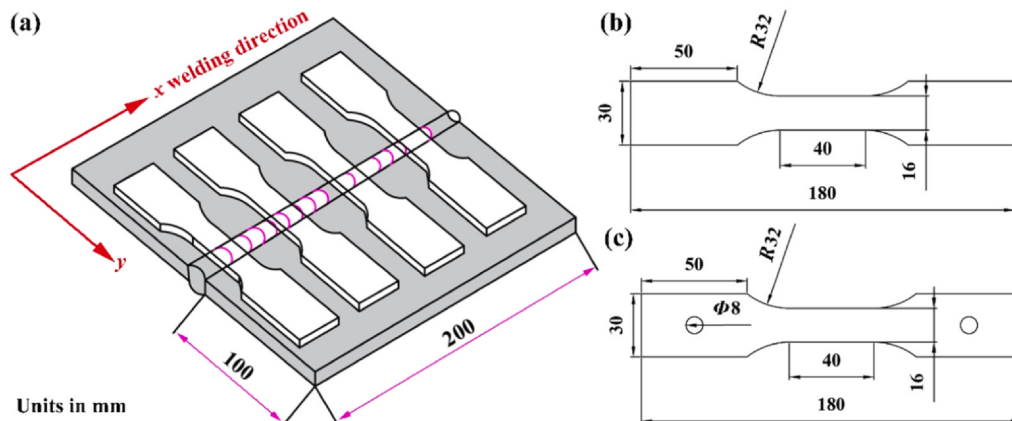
Schematic of sampling and fatigue and creep specimens: (a) Schematic diagram of fatigue and creep specimens, (b) Dimensions of fatigue test specimens, (c) Dimensions of creep test specimens.
